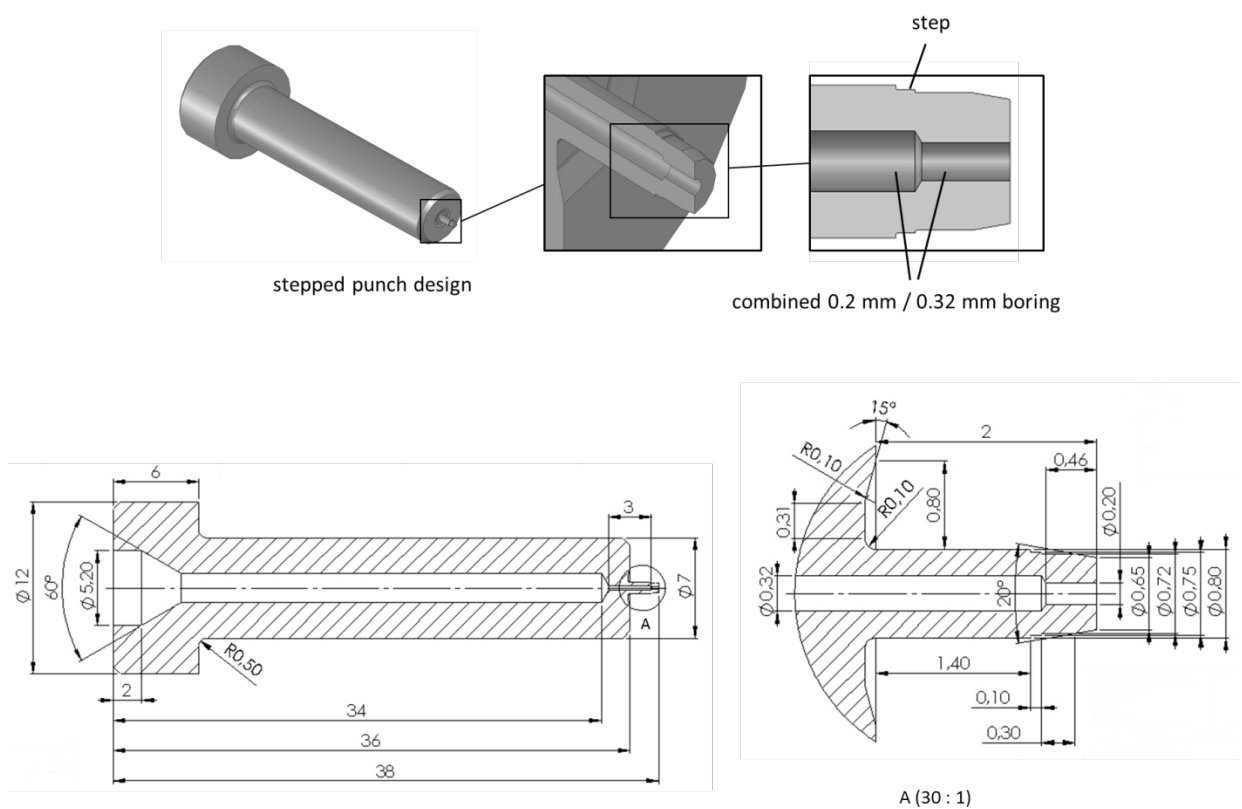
Design and dimensions of a stepped (cylindrical) sealing punch with a combined 0.2 mm / 0.32 mm boring
